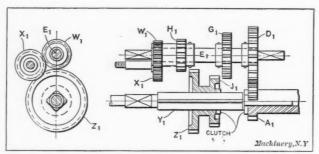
Sketch showing Arrangement of Gears in Transmission Case
